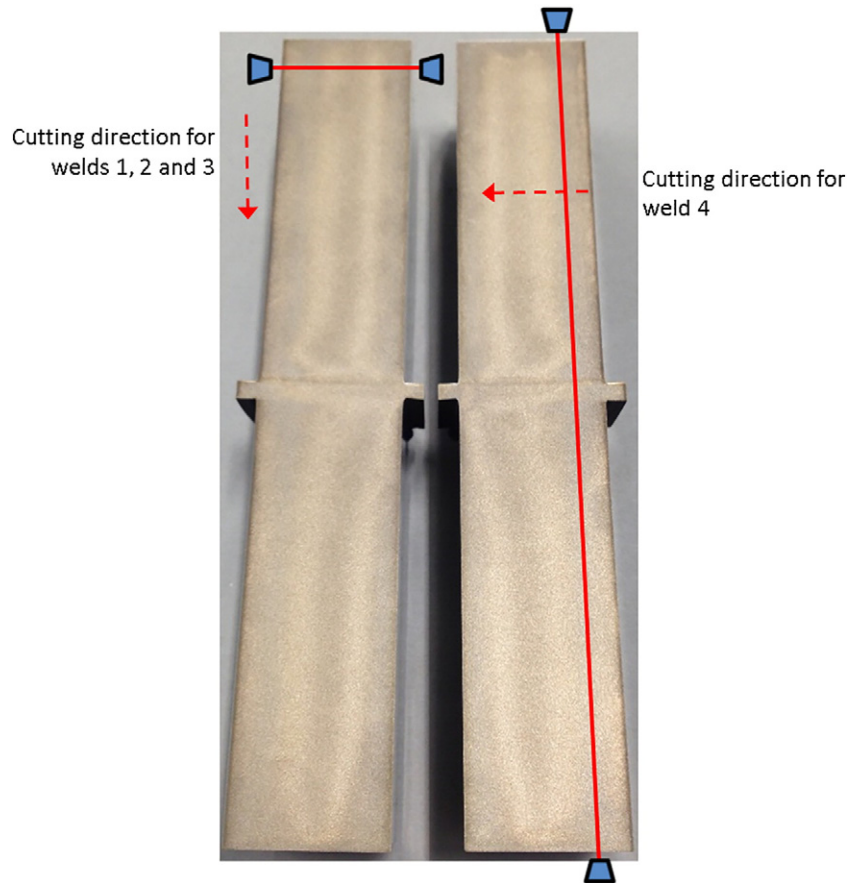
EDM cut directions for the welds 1, 2, 3 and 4.
